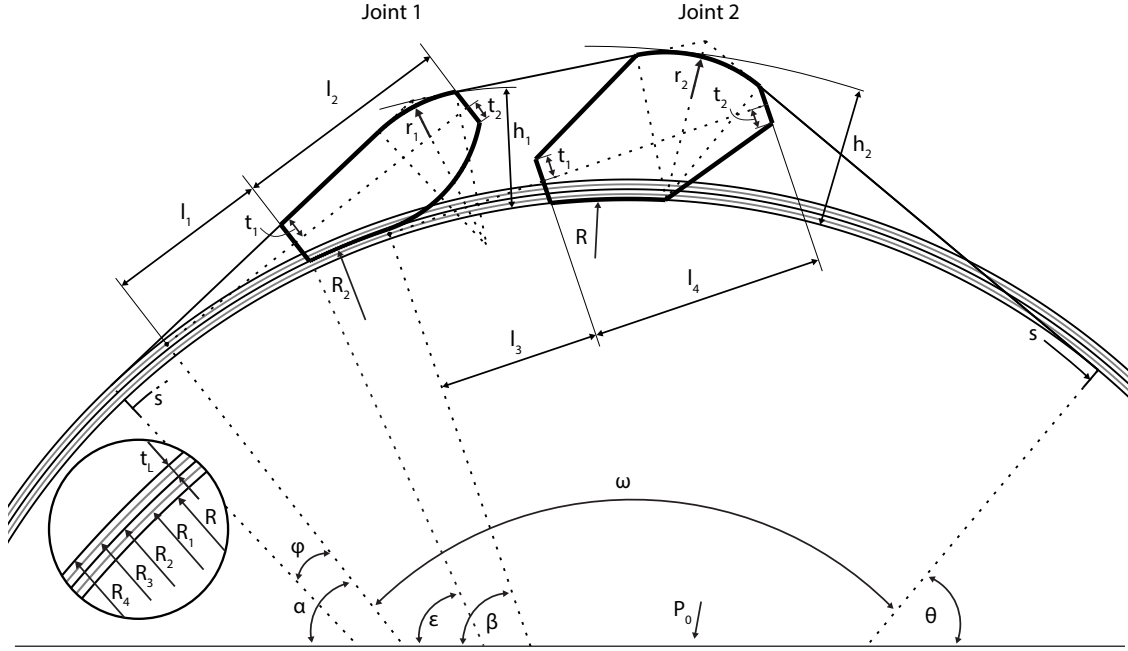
Parametric design of two conforming joints located on a coiling cylinder and a membrane which is used to flatten and package the structure.
